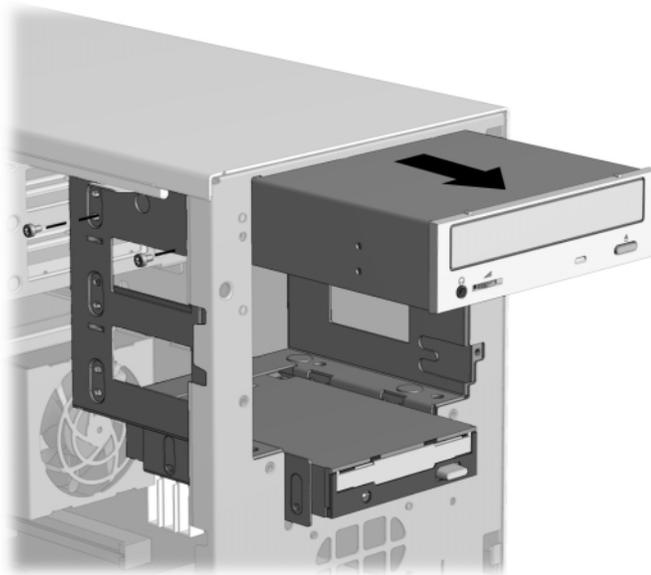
Removing the screws and sliding the CD-ROM drive out of the drive cage
